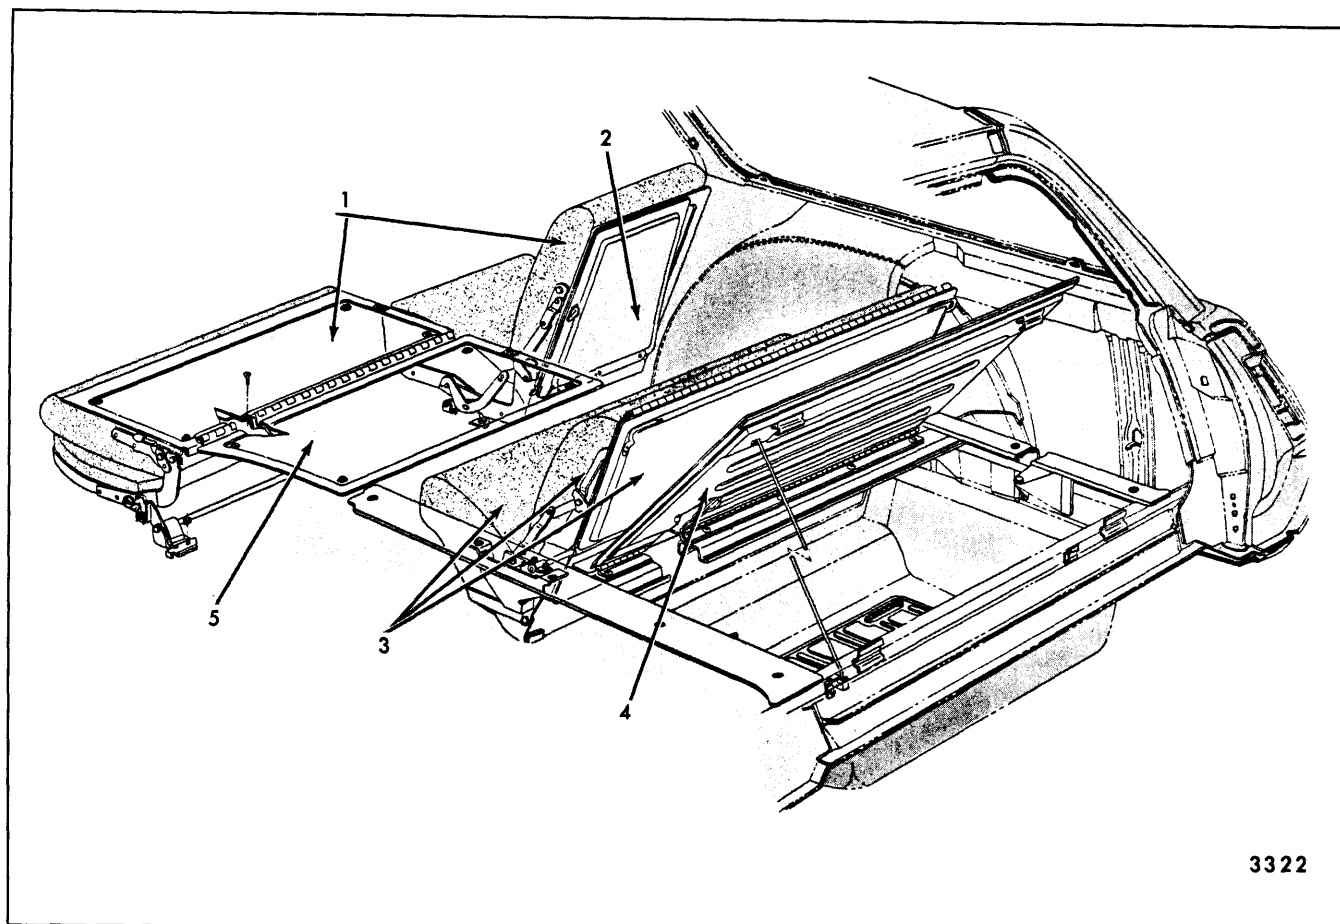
Folding Seats and Load Floor Panels - "A" Body Vista Cruiser and Sport Wagon Three-Seat Styles
